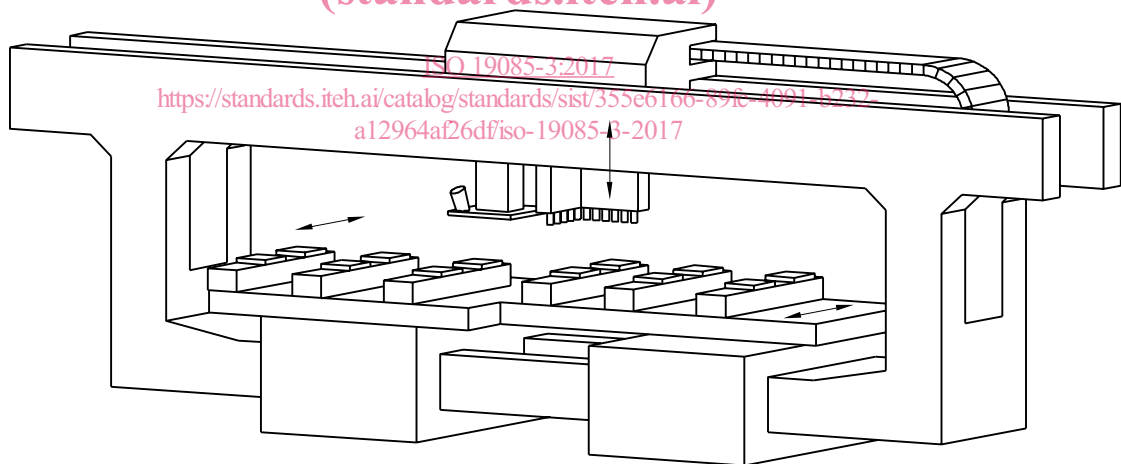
Example of a C frame boring machine with moving tables, fixed portal, moving machining head
